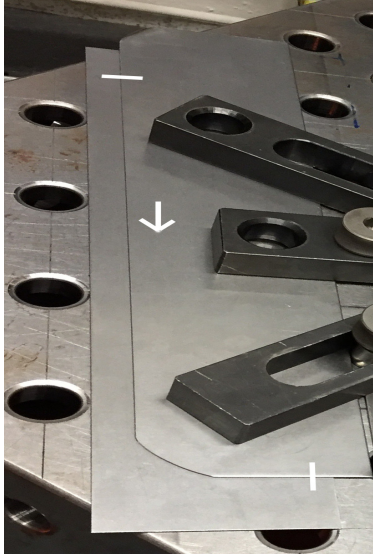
close-up view of seam #1; the marks indicated the beginning and end of the seam.
